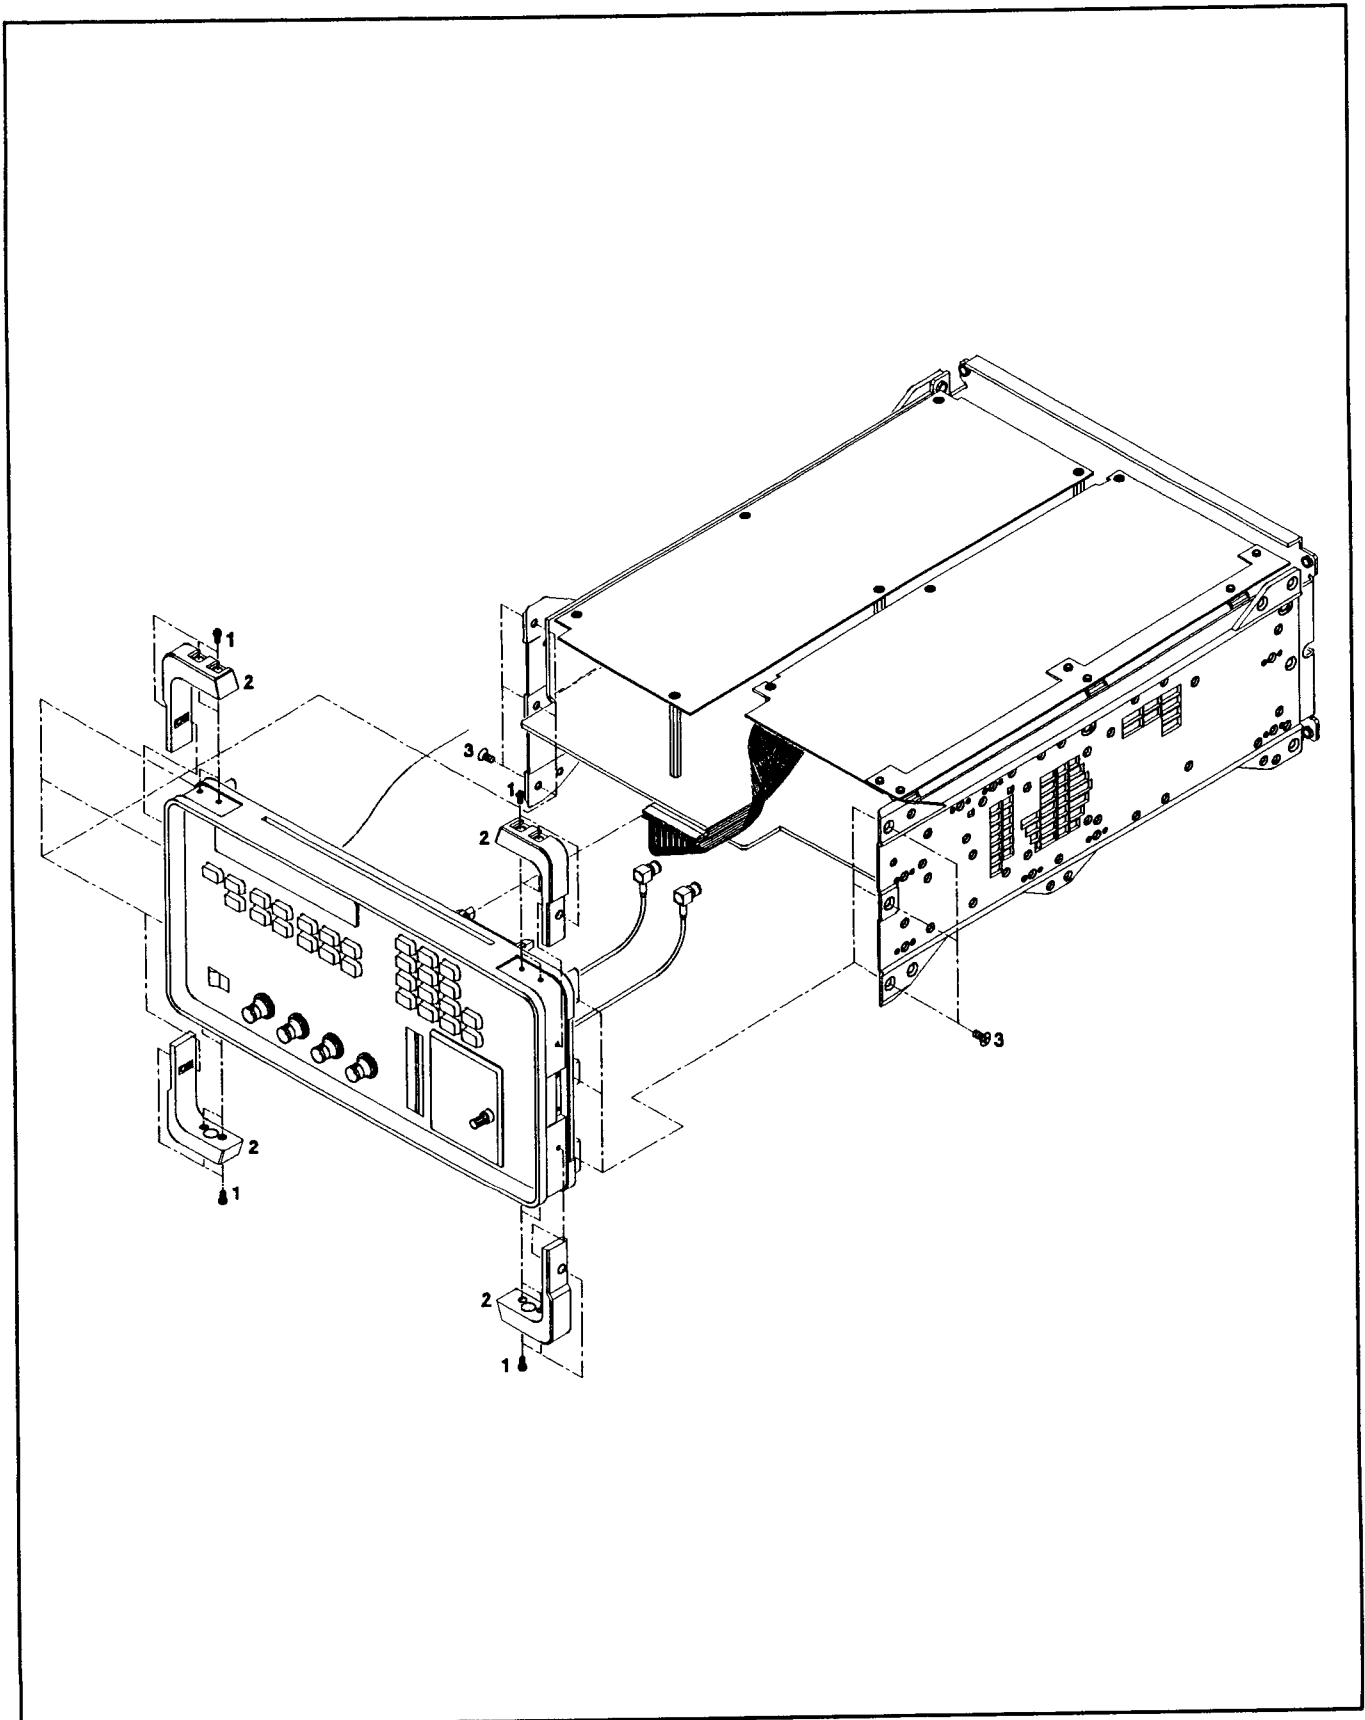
Front Panel Removal Illustrated Parts Breakdown
